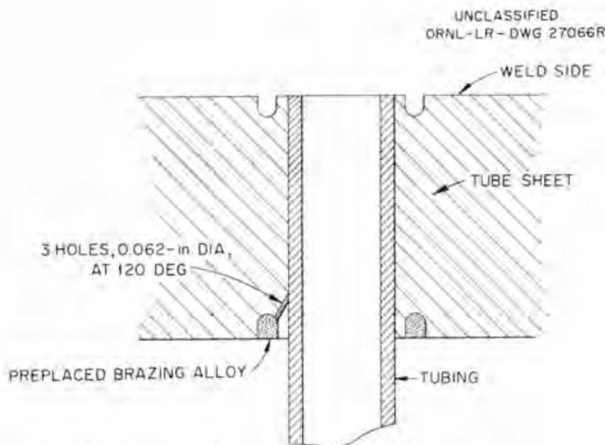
Alloy Preplacement Procedure for Brazing Thick Tube Sheets.
